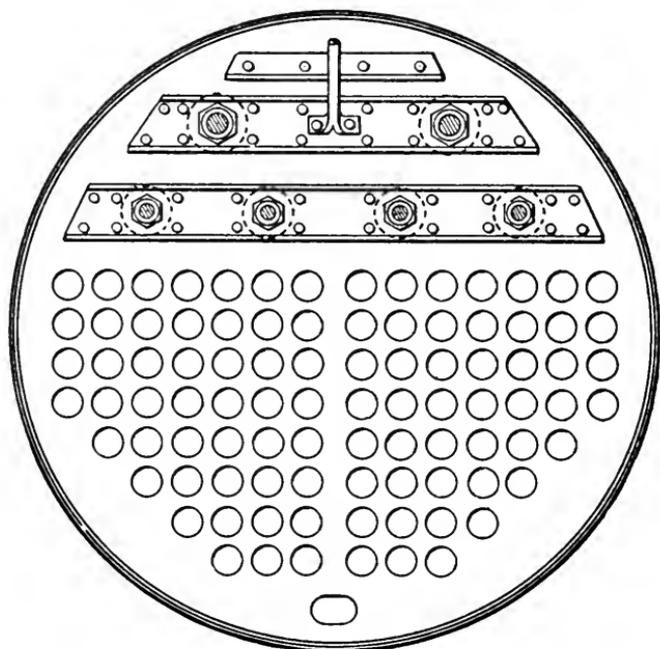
A BOILER HEAD WITH THROUGH BRACES.
